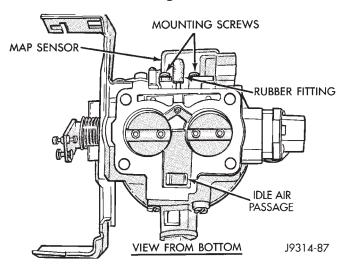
Rubber L-Shaped Fitting—MAP Sensor-to-Throttle Body
